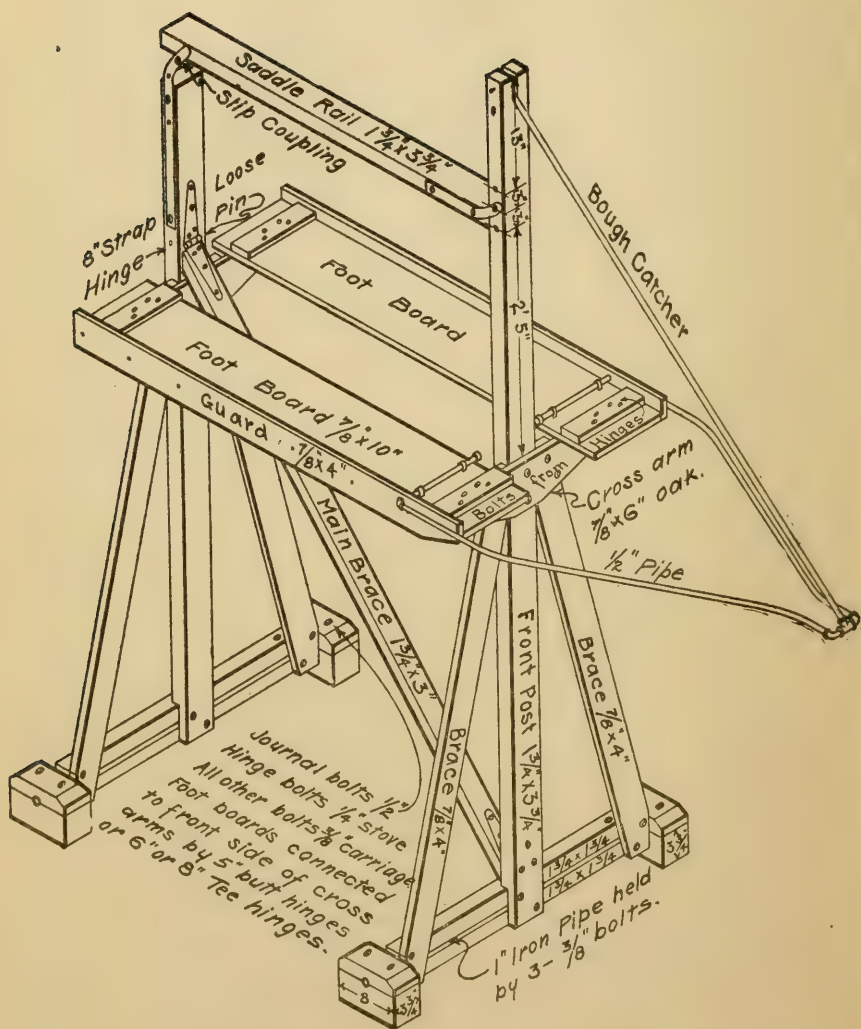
The Cornell Tower. Saddle type of folding tower devised and perfected by the departments of Plant Pathology and Farm Mechanics, Cornell University.
